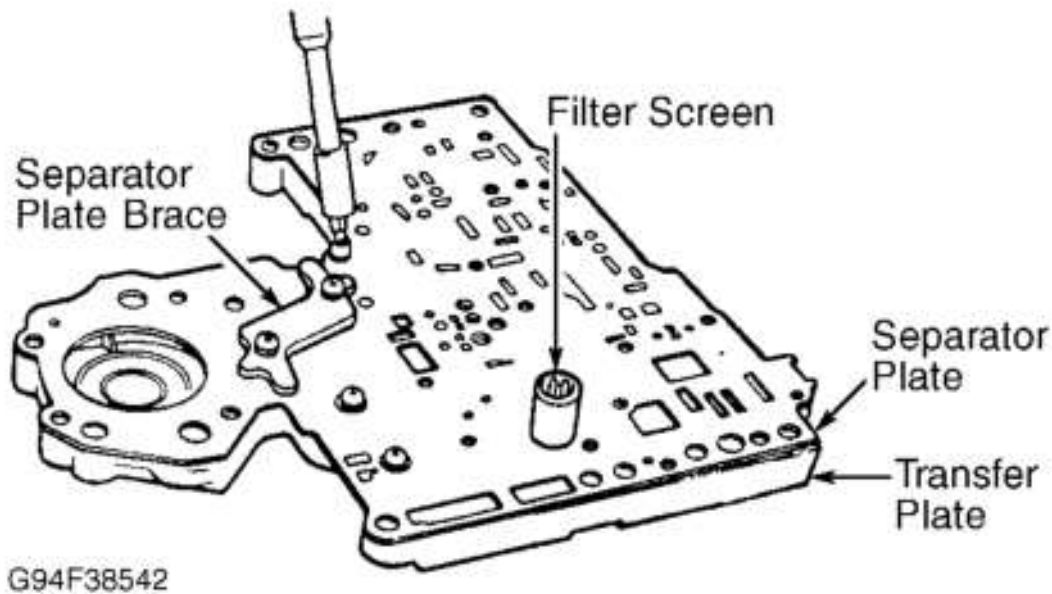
Identifying Filter Screen & Separator Plate Brace
